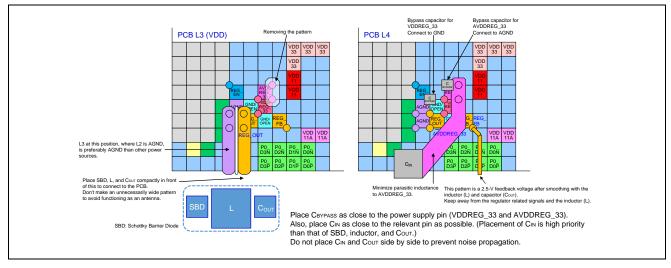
Example of PCB Layout Image (L3 and L4) (23 mm Square BGA Package)
